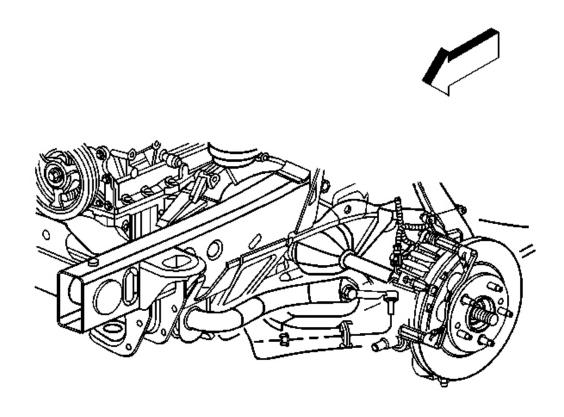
View Of Stabilizer Shaft Link Lower Retaining Nut Courtesy of GENERAL MOTORS CORP.
